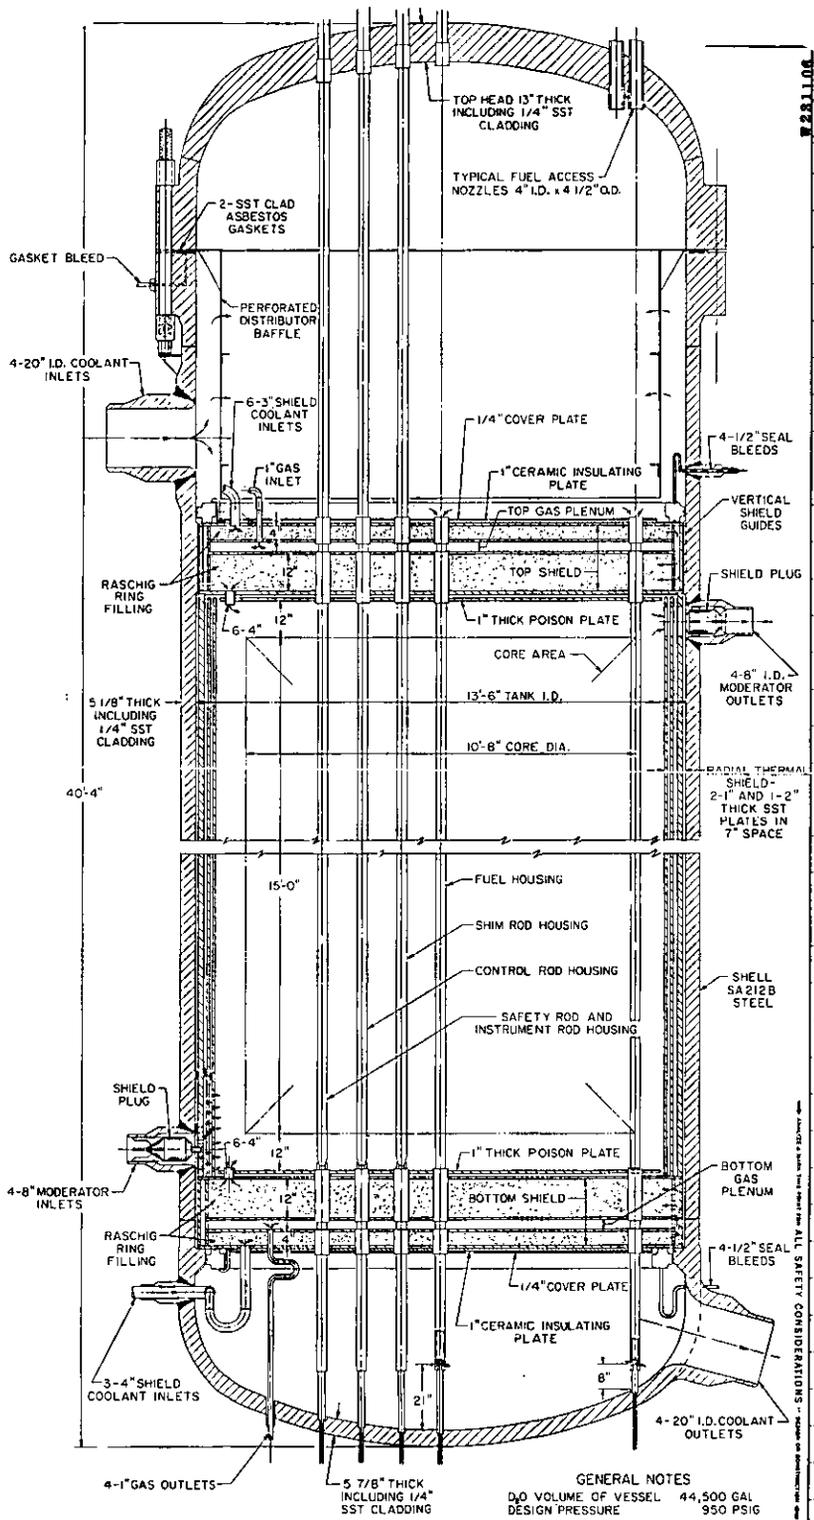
PRESSURE VESSEL REACTOR - LIQUID D₂O COOLED - COLD MODERATOR
